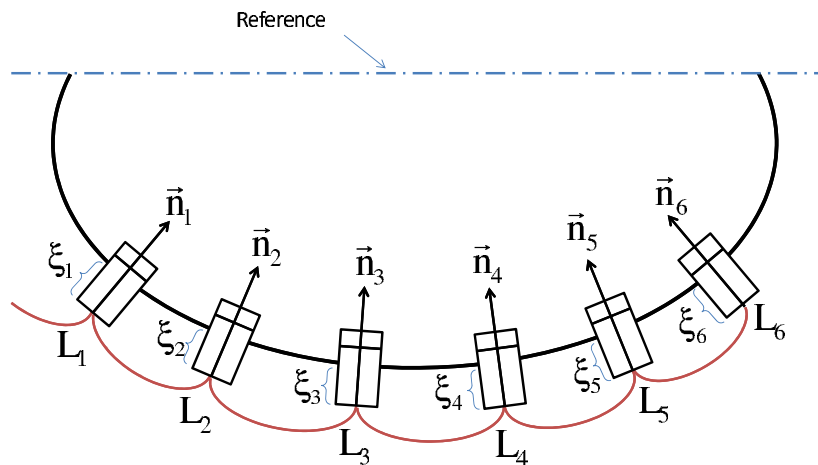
Error of a workpiece on a isostatic fixture (Halevi & Weill, 1995)
